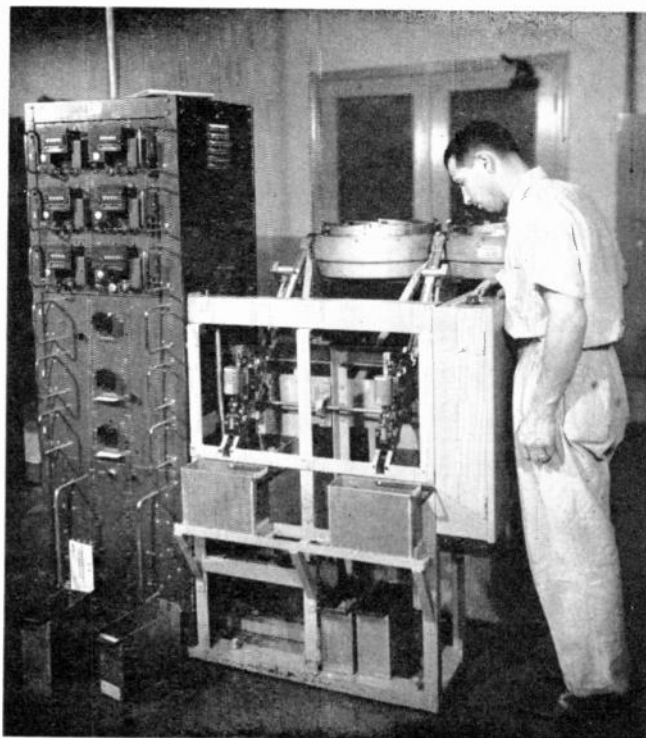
WAFER INSPECTION CIRCUITS ARE SET UP BY PUNCHED CARD
